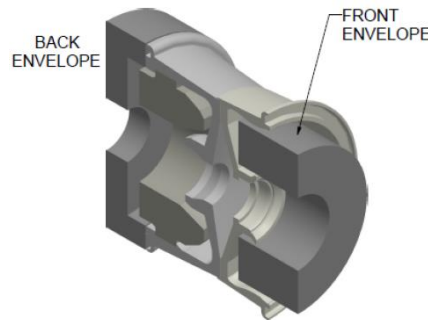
Possible Locations of the Drive Unit within the MLG Wheel [24]
